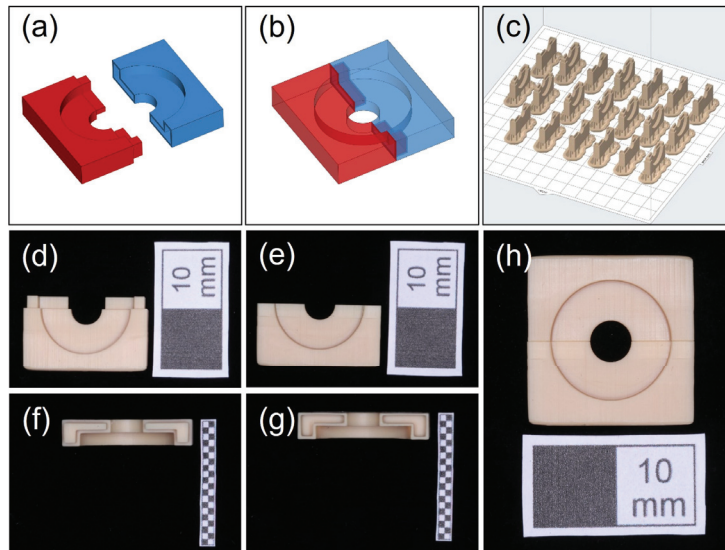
The fabrication of the bonding mold (a,b). The bonding mold was designed as two parts that can be accurately assembled through a lap joint; (c) the direction and layout for 3D printing; (d–h) the 3D-printed parts could be accurately assembled by lap joint (white scale: 10 mm).
